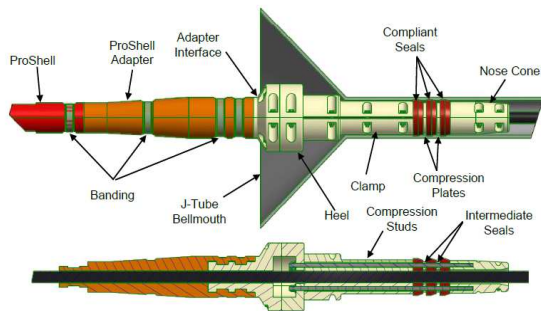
J-Tube Seal & Elastomeric Cable Protection
